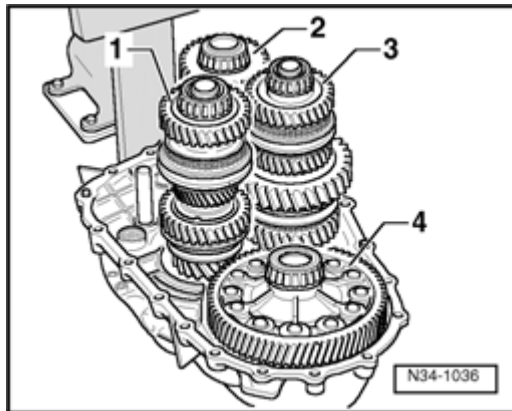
Installed position of output shafts (pinion shafts) in transmission
